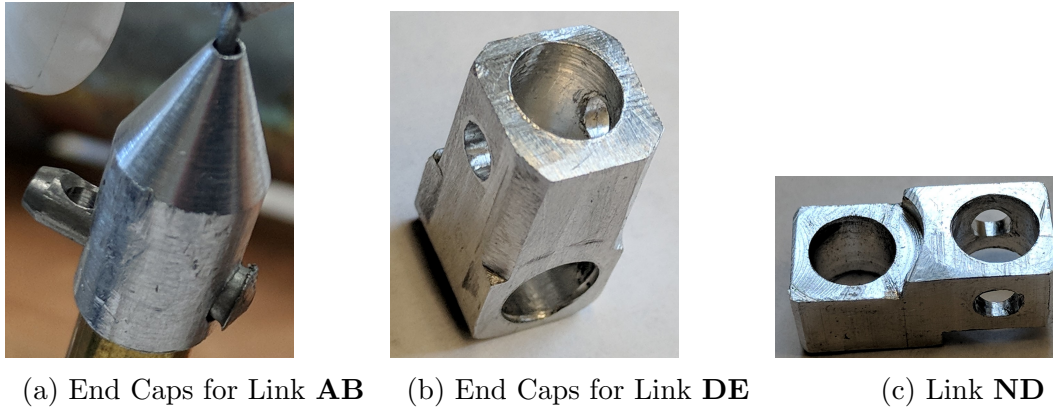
Machined Parts for the Planar Spatial Flapping Wing Mechanism.
